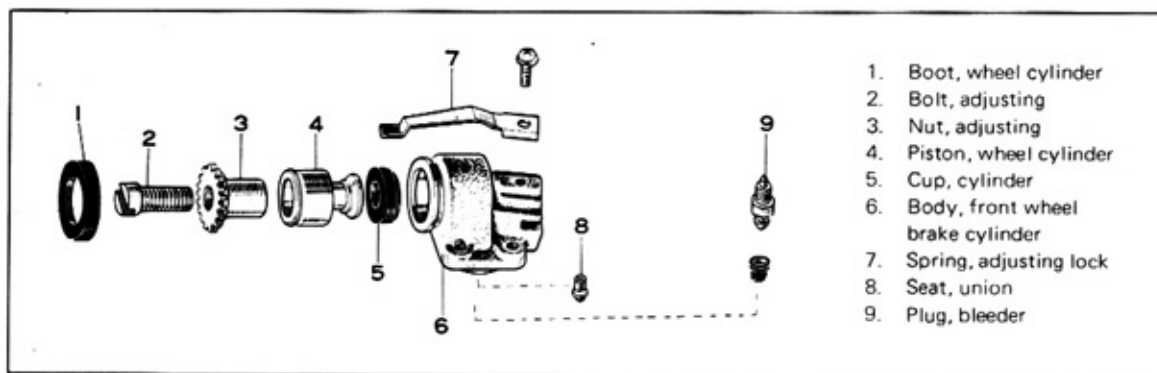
Front Wheel Brake Cylinder Component Parts
